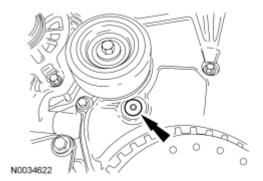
Locating Lower Front Cover Timing Hole Plug Courtesy of FORD MOTOR CO.
